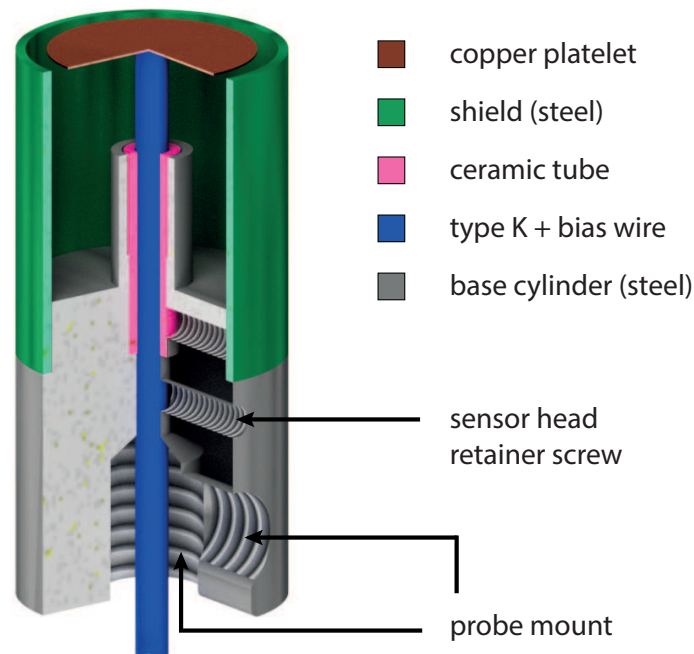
CAD drawing of the improved PTP design with a stainless steel housing and a smaller, 11 mm diameter copper platelet.
